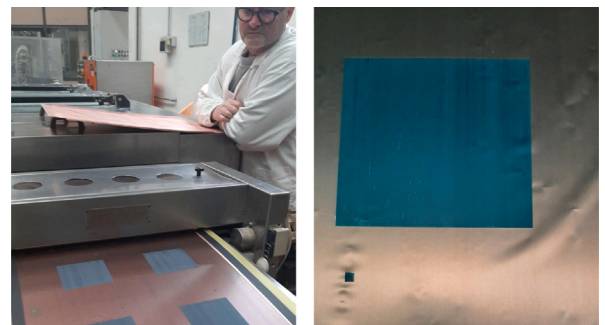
The DLC foil at the end of the patterning process, ready to be glued onto the readout PCB.
